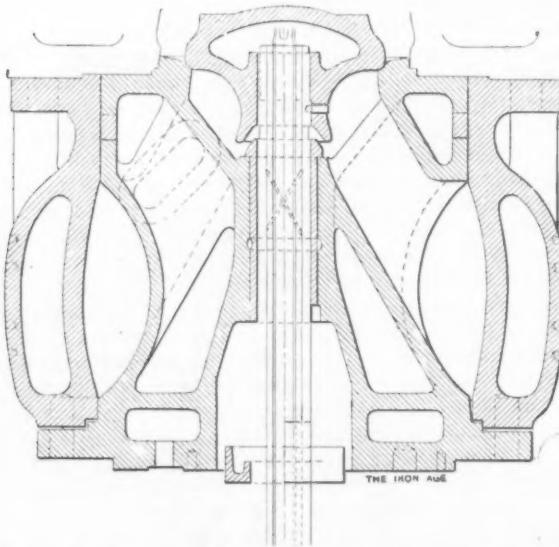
Detail of the Exhaust Valve as Modified from the Form Shown in Fig. 3.
